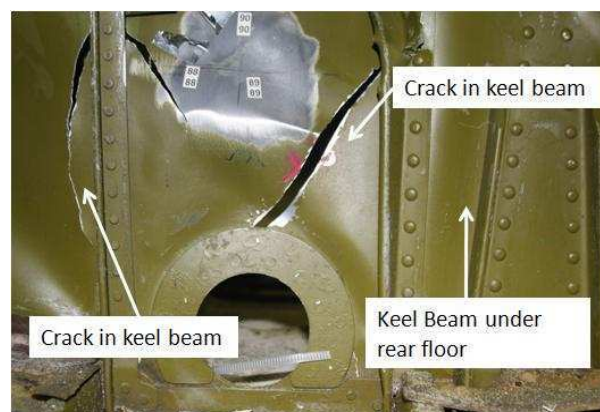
Rear Keel Beam failure in MD-500 without DEA test
